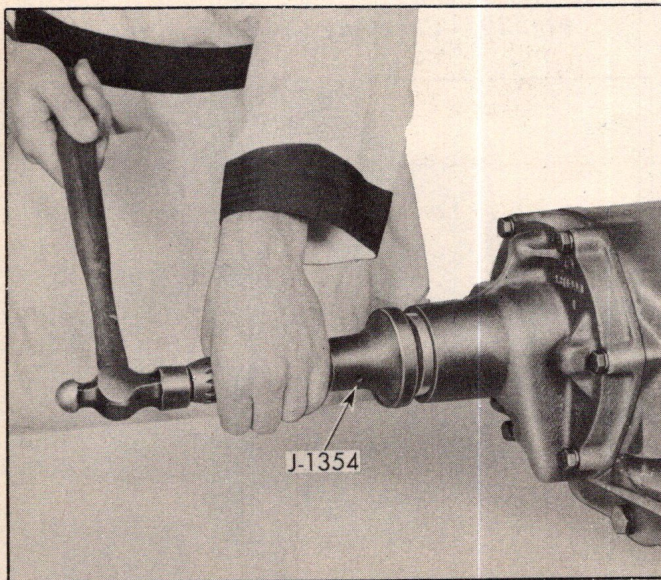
Installing Rear Bearing Retainer Oil Seal
